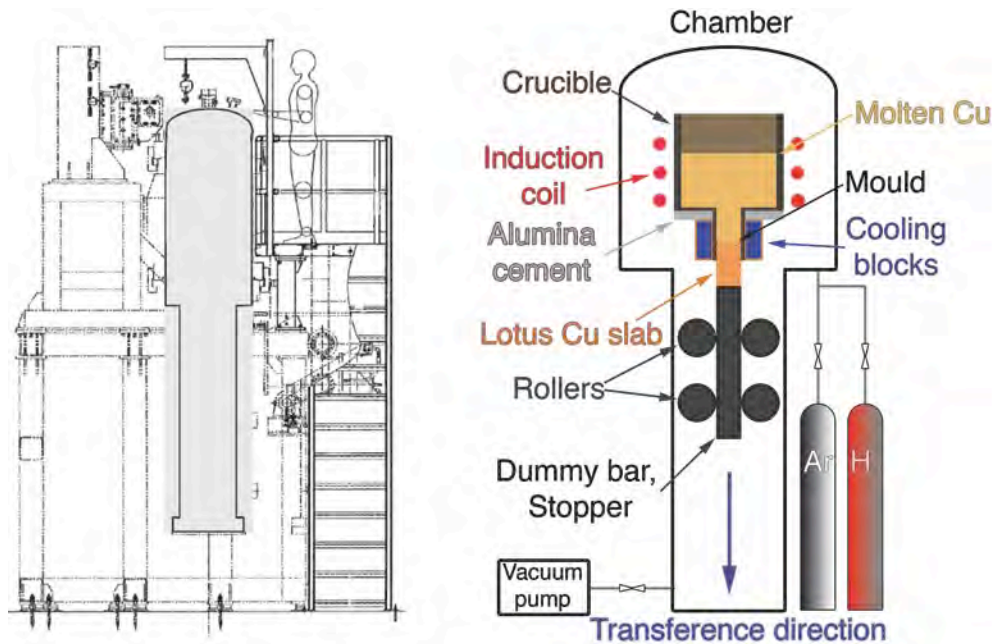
Schematic drawing of the fabrication apparatus to produce lotus metals using the continuous casting technique. Large crucible and induction heating coil are located in the upper part of the pressure vessel, while the mould with cooling blocks and movable mechanism is at the bottom part. The height of the apparatus is about 7m. About 1m lotus ingot in length can be produced. The dummy bar is connected together with the melt at the mould.
